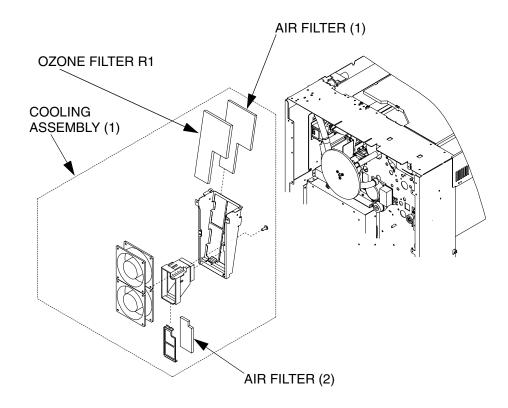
Removal of the Air Filter (1), (2), and Ozone Filter R1
